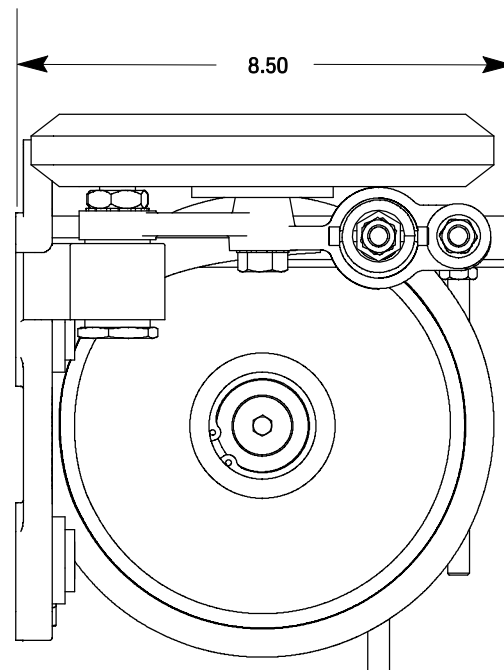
63190 and 63801 Roller Guide Assembly Load and Dimensional Data
